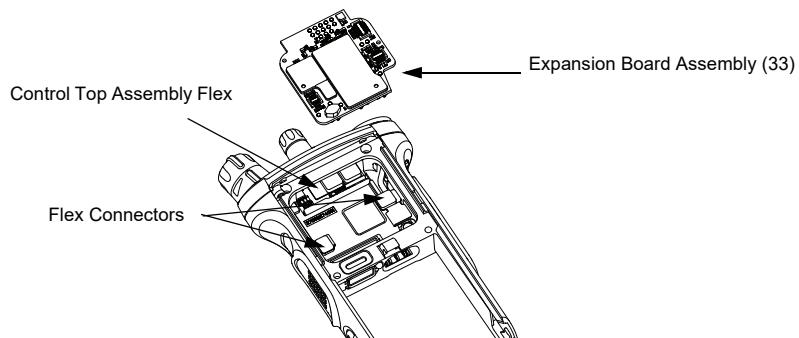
Remove Flex Connectors and Expansion Board Assembly
